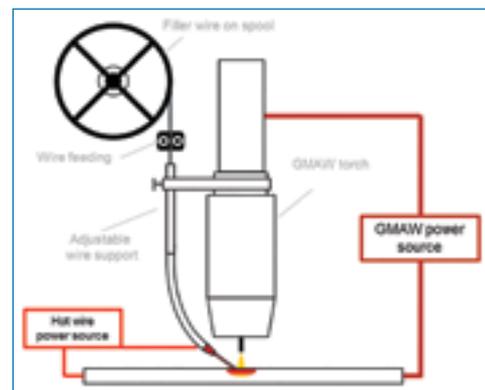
A process diagram for GMAW hot wire welding.
